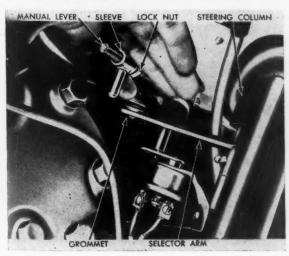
Position of lever when shift is in drive position. Lengthen rod, turn sleeve one full turn.
